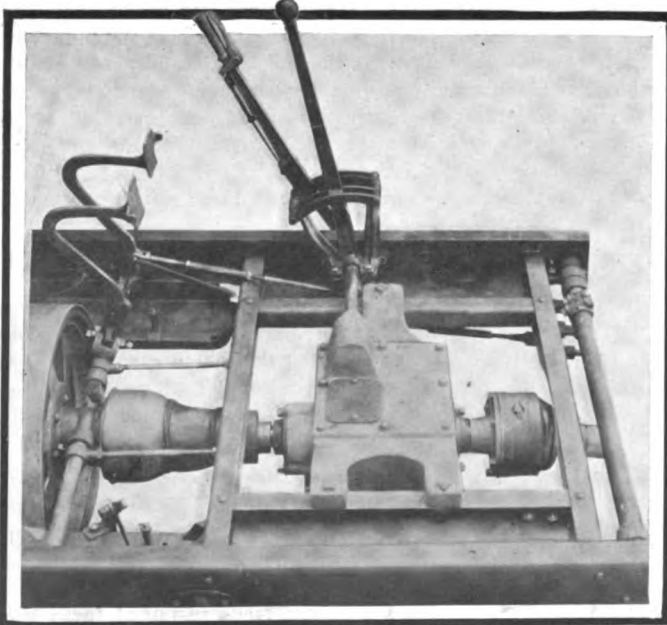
Control mechanism on the model 32, showing the suspension of the gearbox
